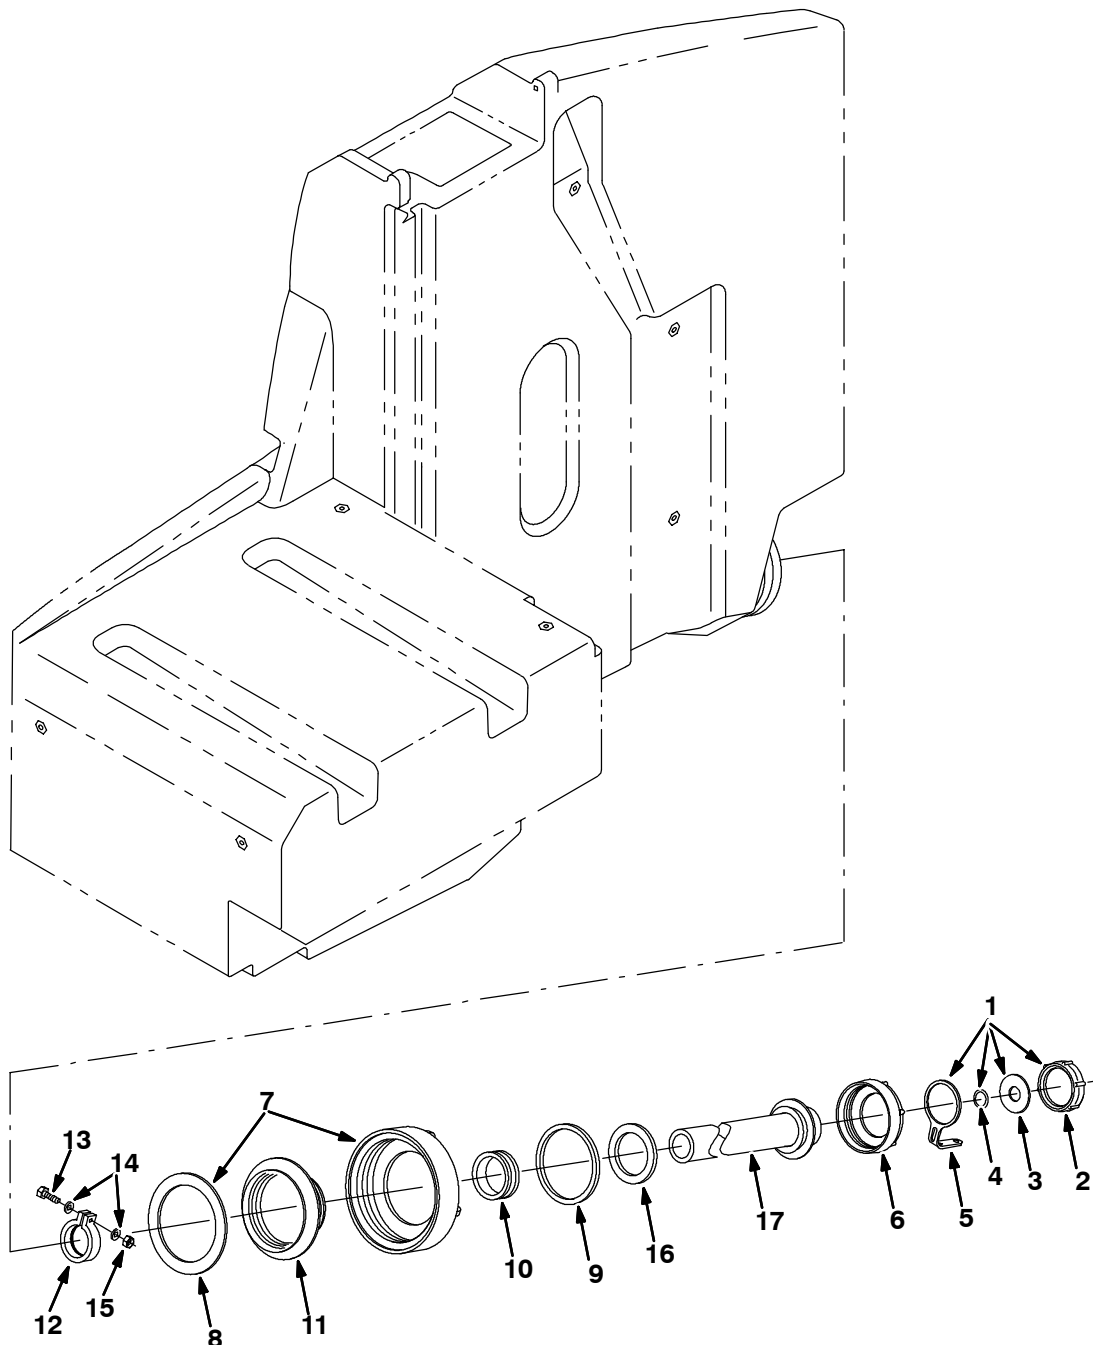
ES™ DRAIN ASSEMBLY KIT 387467
